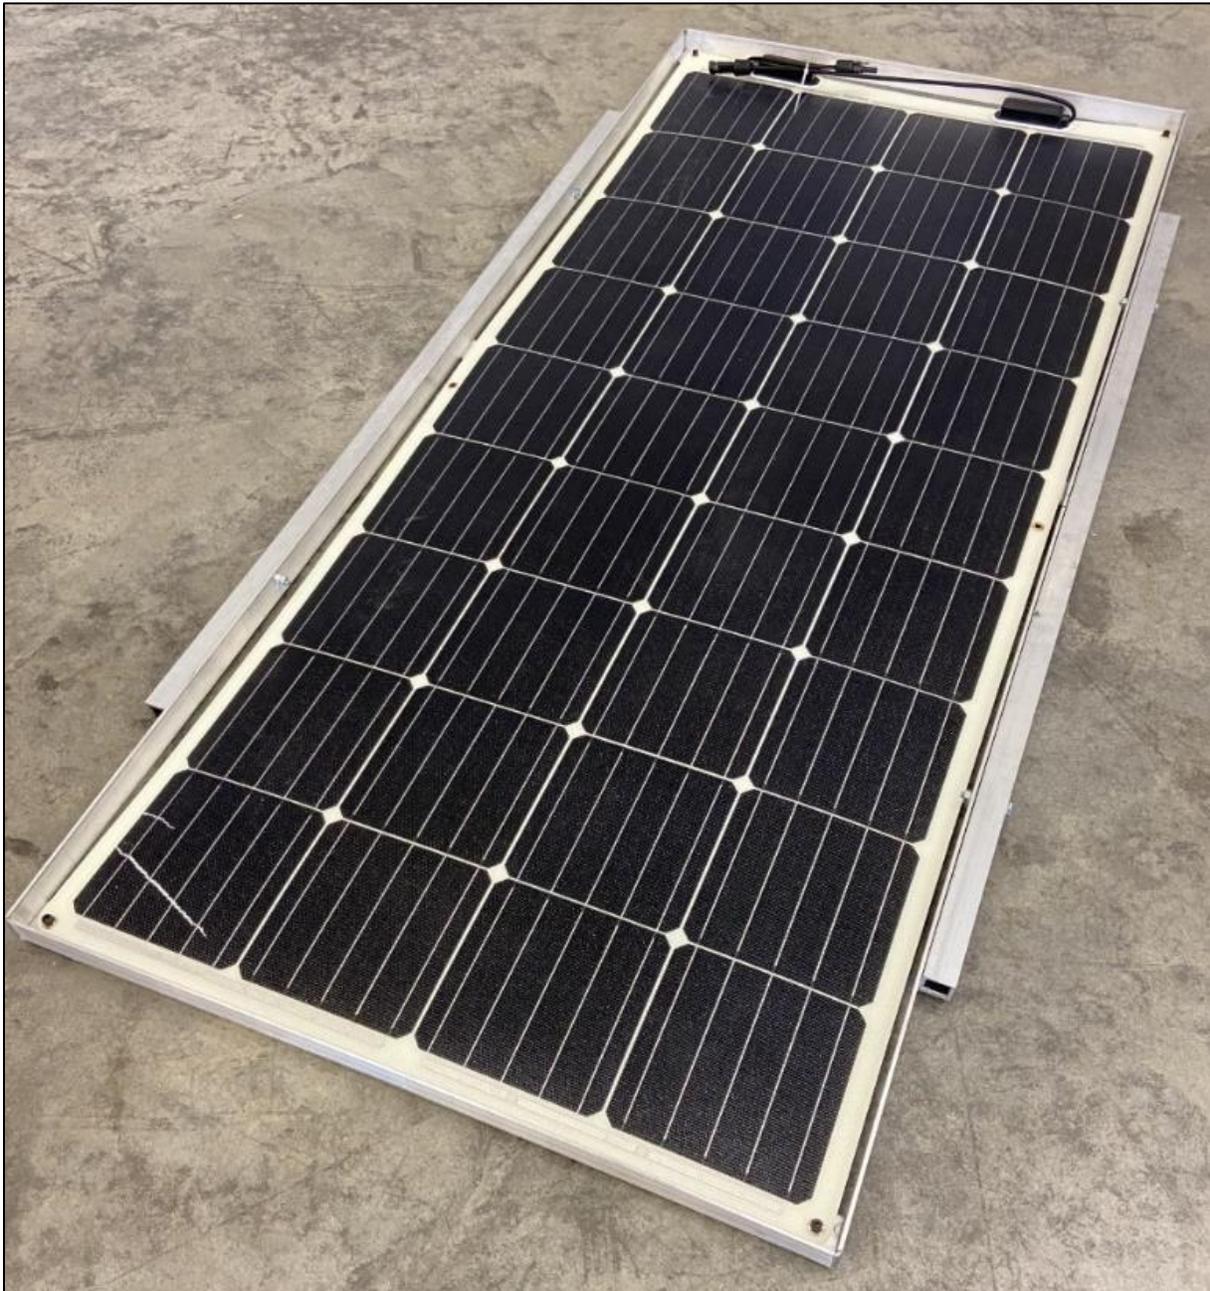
Final Assembly of Frames, Rails, and Solar Panels
